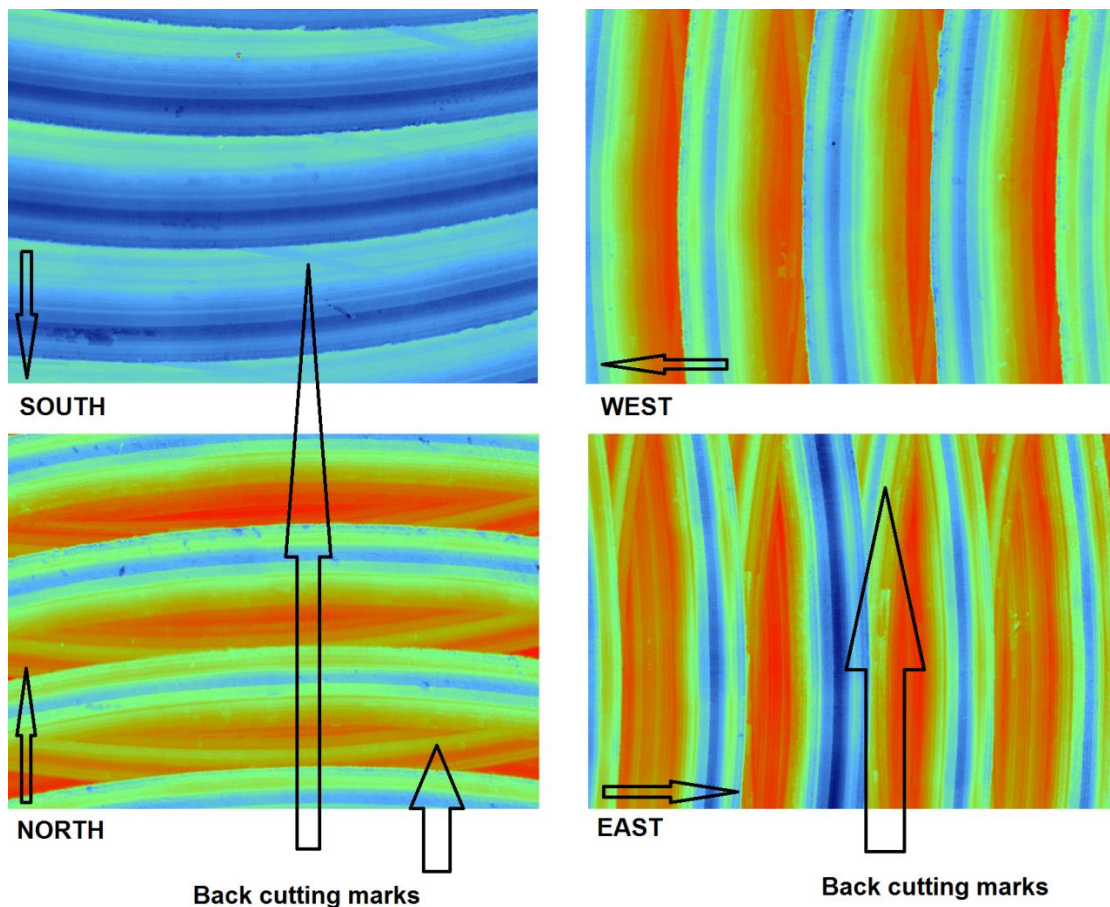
Sample #33 - #36, Feed = 0,4 mm/tooth, material 1.1730 – Machined with KONDIA milling machine
